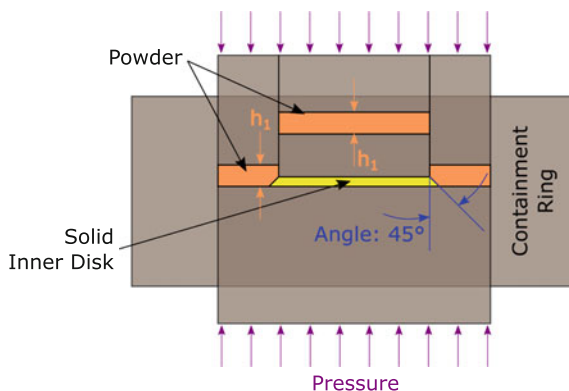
Assembly of graphite or carbon fibre reinforced carbon die, machined inner disc, and powder rim for manufacturing of hybrid disc
